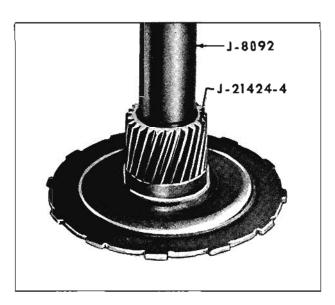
Installing Low Sun Gear and Flange Assembly Bushing
